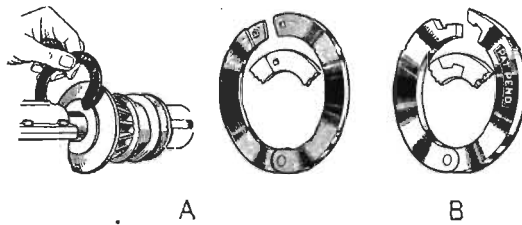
Quick repair washers: A, side latch; B, over latch.
